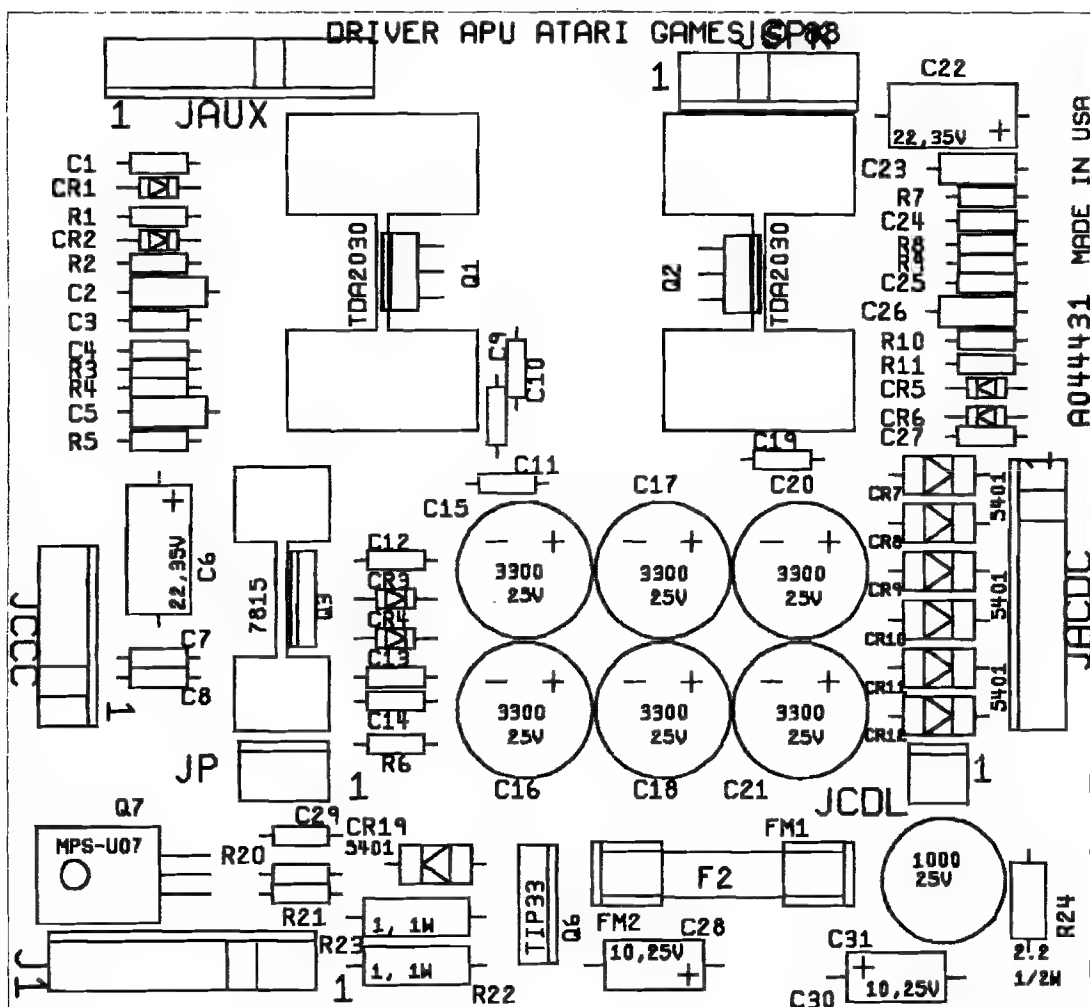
Hard Drivin' Compact APU PCB Assembly
